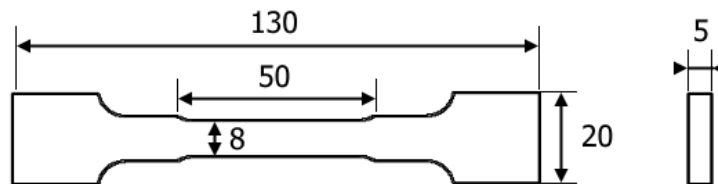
Schematic drawing of the tensile test sample, including dimensions in mm.
